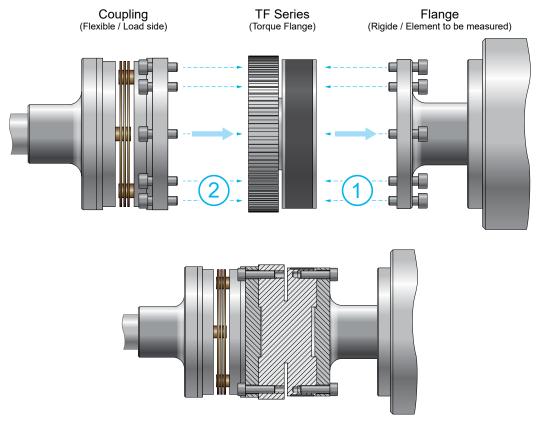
Recommended assembly process for TF 309 - TF 312
